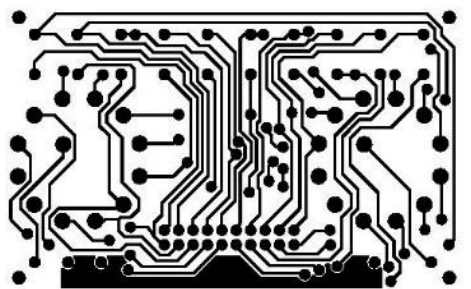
Oscilloscope Channel Selector PCB Mask Bottom
